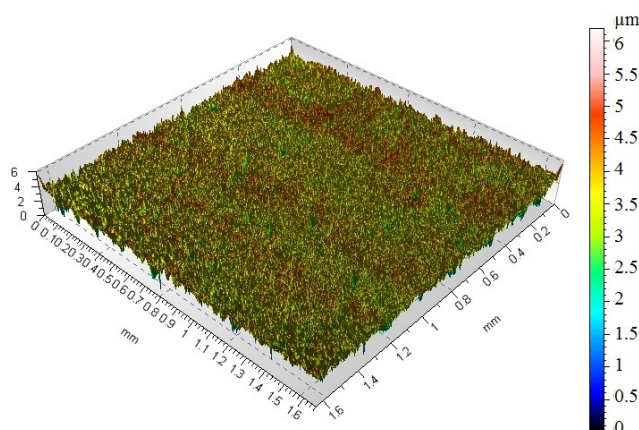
Three-dimensional optical surfaces of the cartage case after vibratory deburring with abrasive paste on 90 min; $S_a = 0.41 \mu\text{m}$
